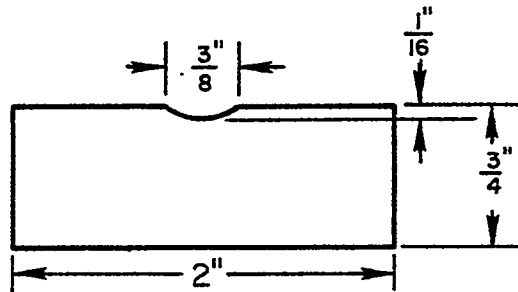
MULTIPASS FIRECRACKER GROOVE WELDS
